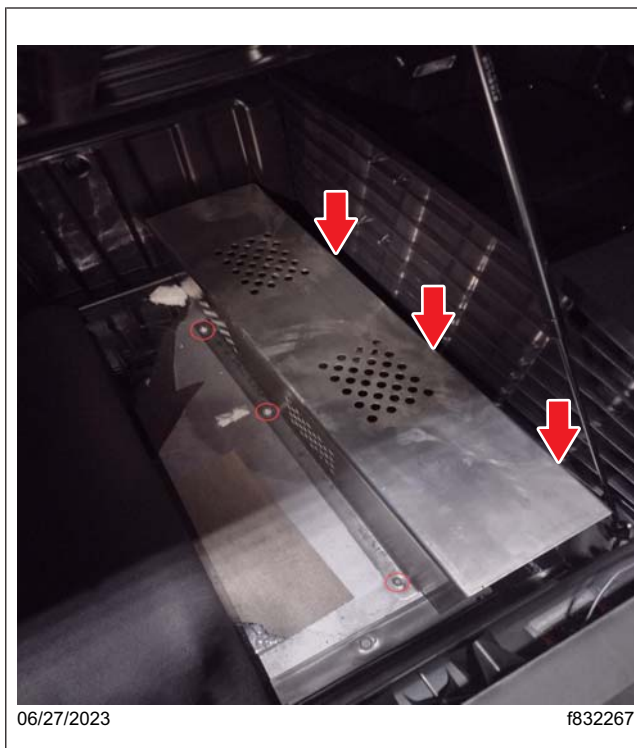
, Location of the Auxiliary Heater Cover Fasteners
